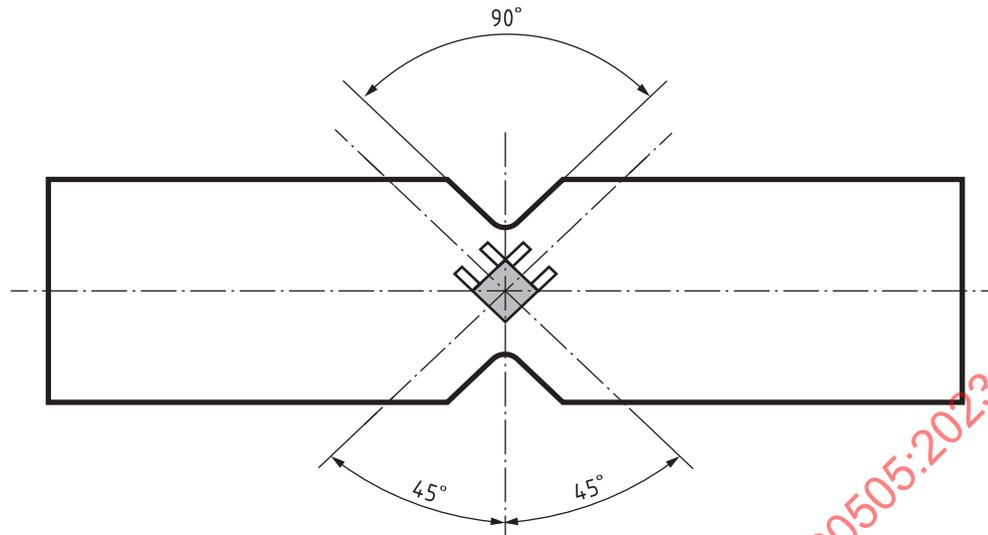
Example of test specimen equipped with strain gauges: superposed strain gauges, bonded in the centre and at 45° from the axis
